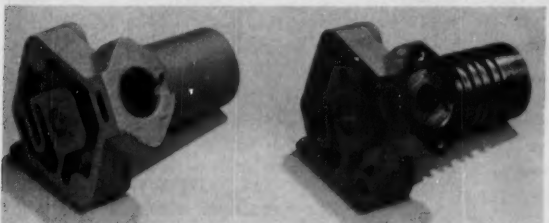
Governor body casting, left, and the same casting machined, with a bushing in place, right. Nominal machining stock allowance on these parts is 1/32-in.
